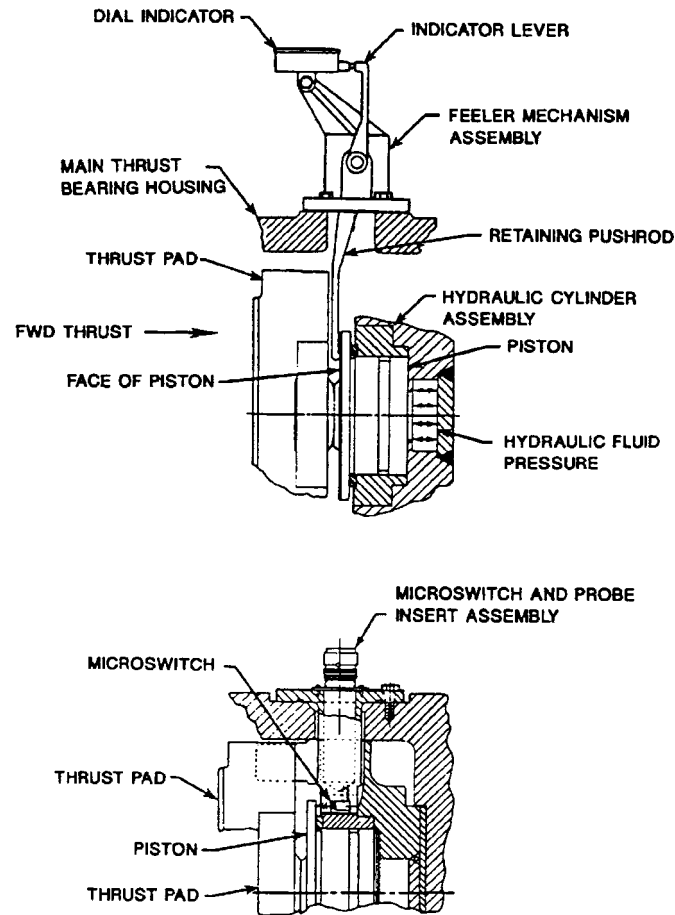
Feeler Mechanism Assembly with Microswitch and Probe Insert Assembly (Waukesha Bearings)
